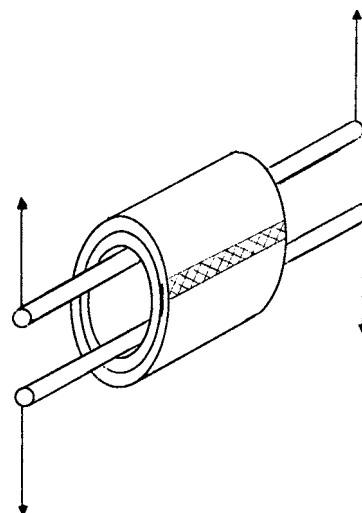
Schematic Presentation of the Pipe Ring Test Showing the Aluminum Weld at 90° to the Tensile Axis
